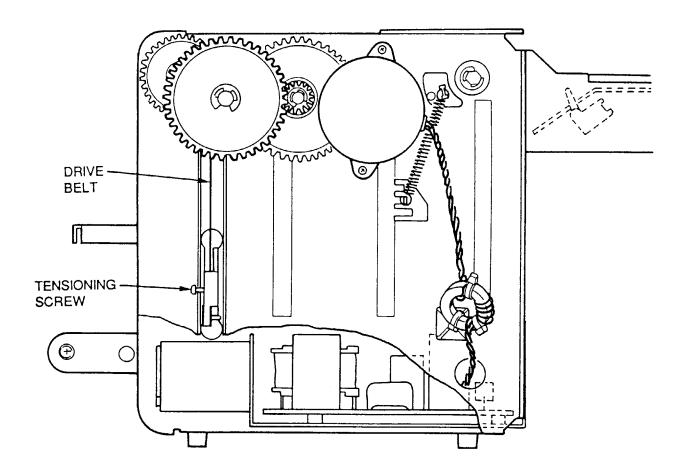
ELEVATOR DRIVE BELT ADJUSTMENT
